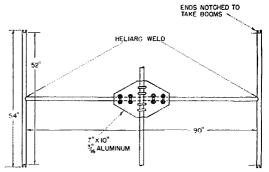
H-frame that supports the booms in the 2-meter array is a one-piece welded assembly. Horizontal member is fastened to the main vertical support by means of a plate of sheet aluminum and eight ¼-inch U bolts.
